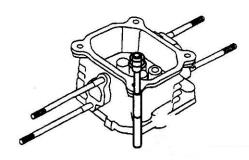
Valve Guide Driver Shown 5.5 mm (0.2165 in.)
